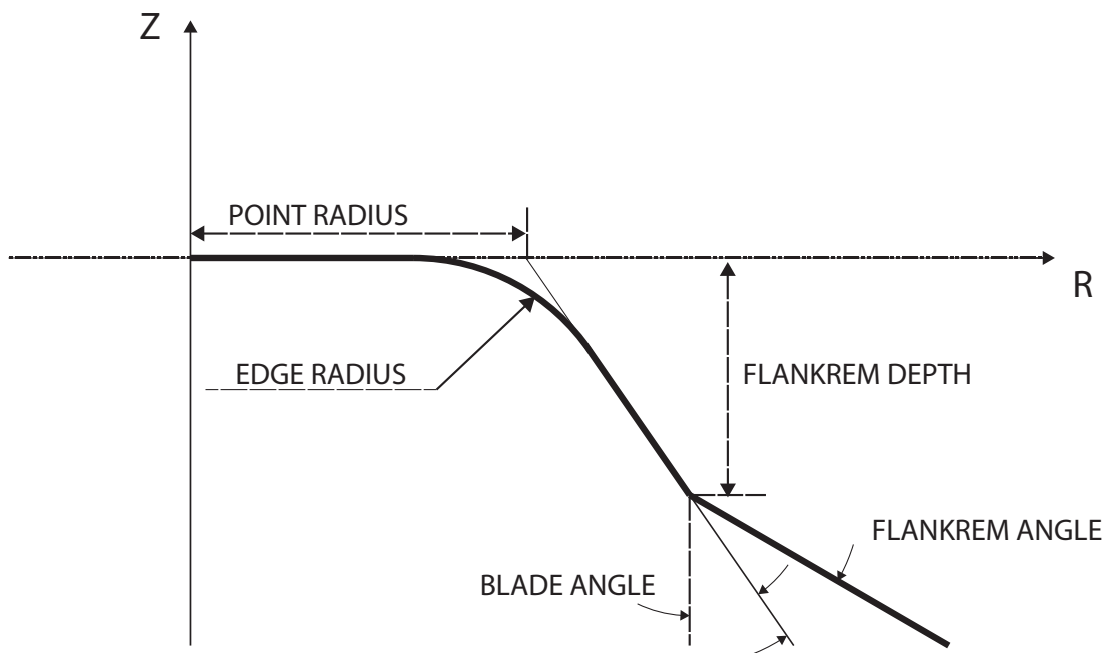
Cutter description for Straight Blade with Straight Flankrem (New Cutter)
